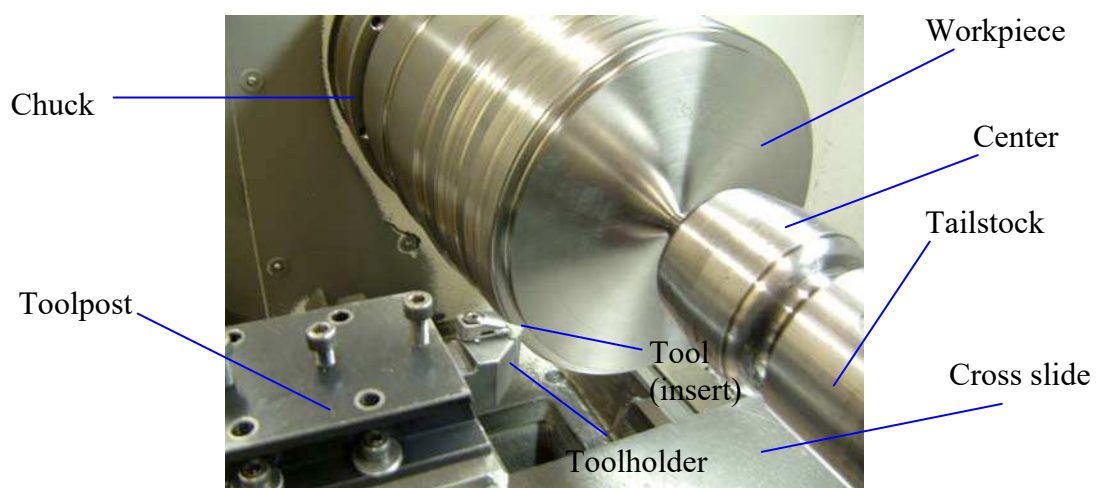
Workpiece-tool-machine system for turning operation.
